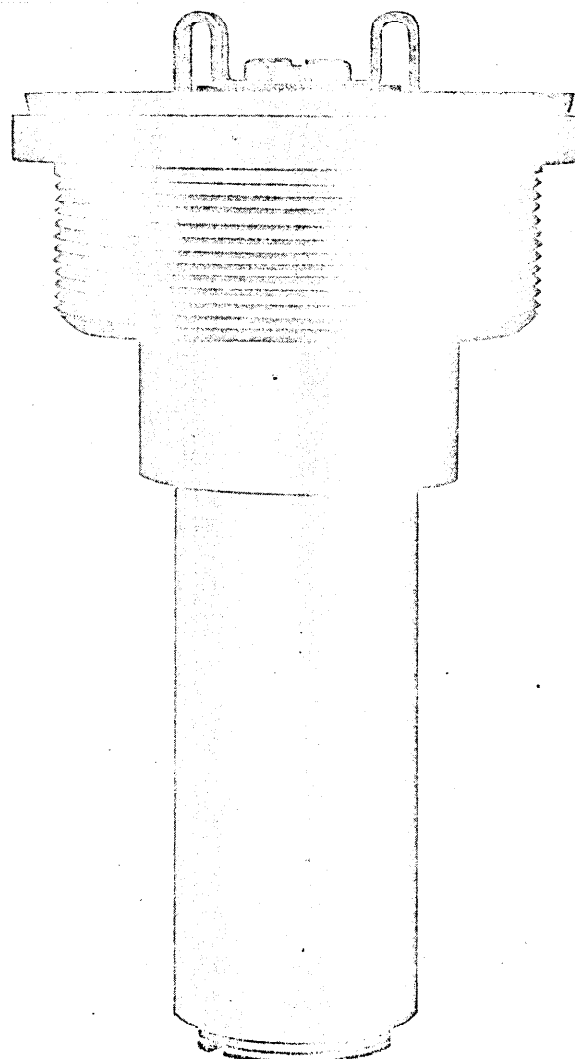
Base Fuze Mk 157 Mod 2, External View Full Size (approximately).
